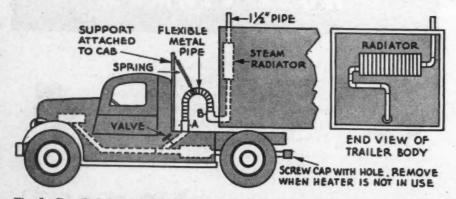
Detailed drawing of original trailer heater. Heat is drawn from exhaust line and controlled by valve placed ahead of muffler. Fig. 2. An actual installation, showing a slight variation from the original plan by leading the exhaust pipe through the front end of the trailer body instead of the roof. Fig. 3. Heater and cargo are protected by enclosing the unit in this method. Fig. 4. Method of hanging radiator in trailer body
